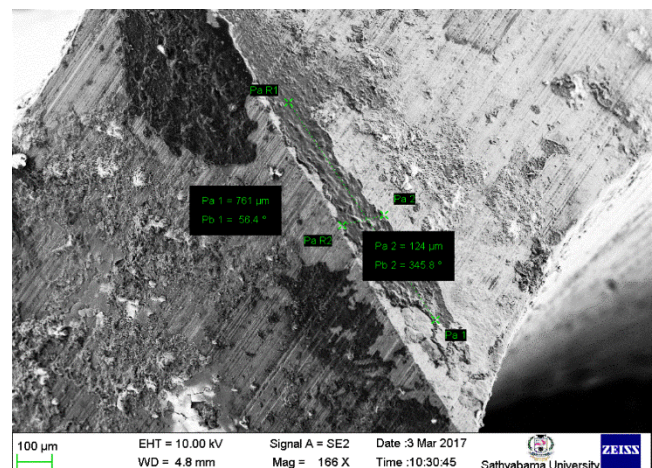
8-mm Cobalt Drill Bit after Drilling
